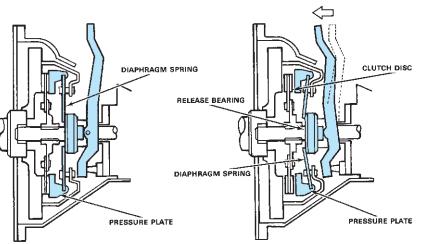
A clutch cover (pressure plate assembly) is bolted onto the flywheel with the clutch disc between them (a). The release bearing and fork provide a method to release the clutch. When the clutch is engaged, the disc is squeezed against the flyweel by the pressure plate (b). Releasing the clutch separates the disc from the flywheel and pressure plate.
